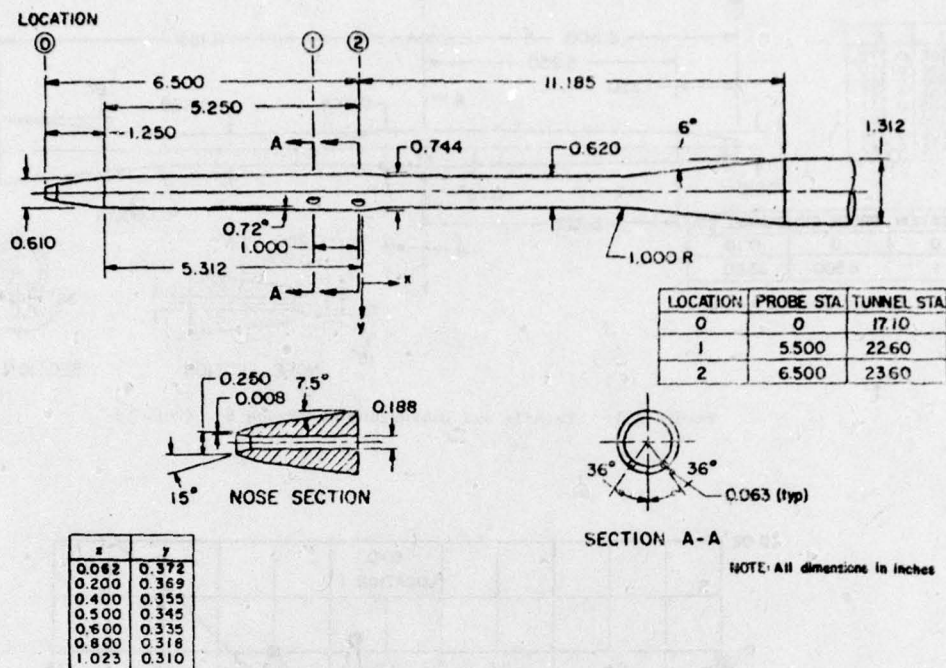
Details and Dimensions for Probe A (Ref. 6)
